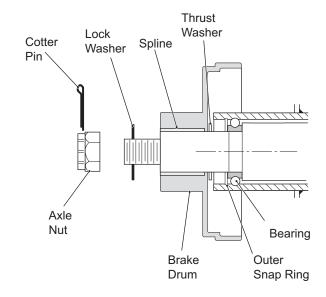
Cut Away of Outer Bearing and Brake Drum
